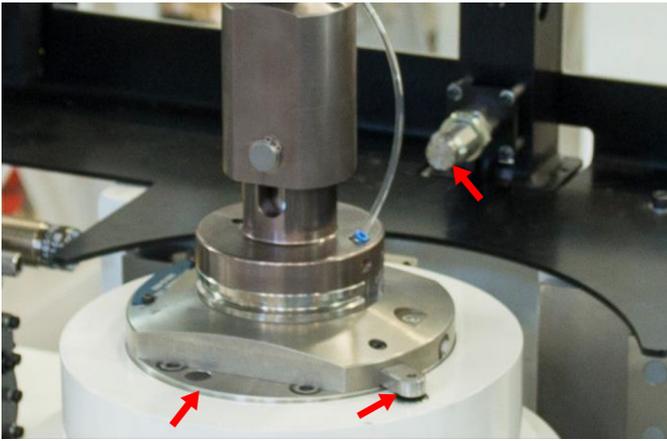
Left to right: Machine interface, tool RFID chip, and air nozzle
